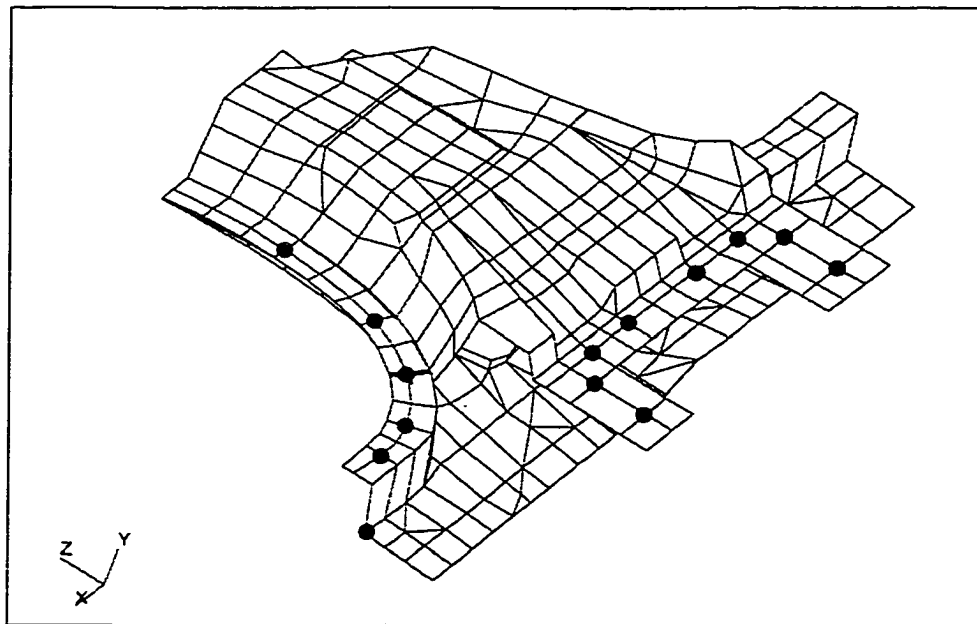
Optimal Design Pattern of Spot Welds (Case 1, Part D, View 1)
